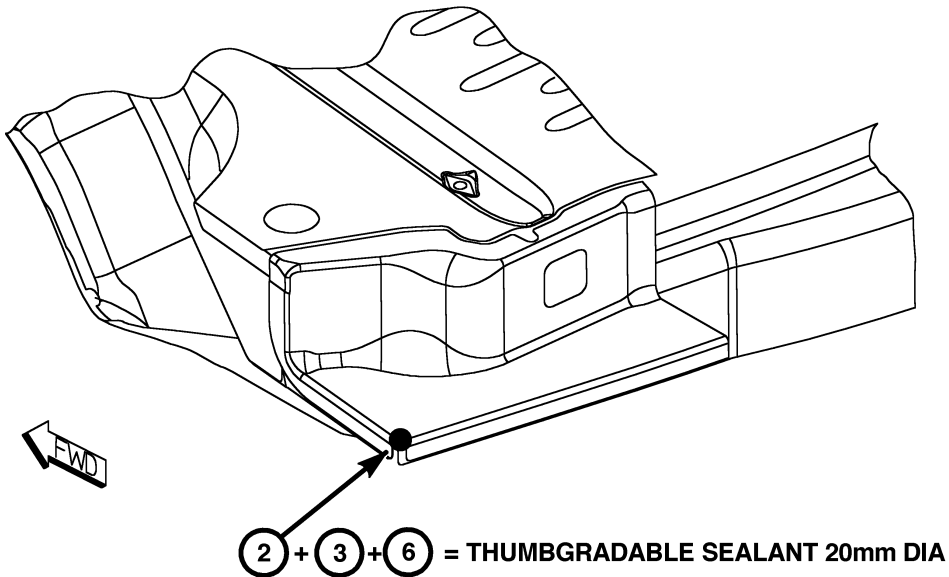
ROOF PANEL & BODY SIDE SILL ASSEMBLY
